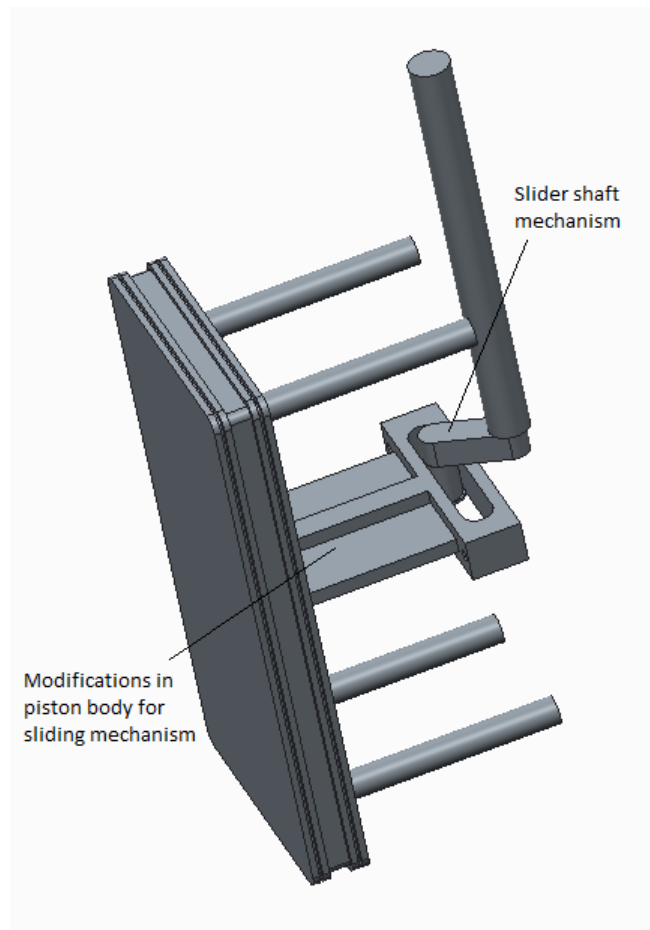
Scotch-yoke mechanism with piston and shaft.
